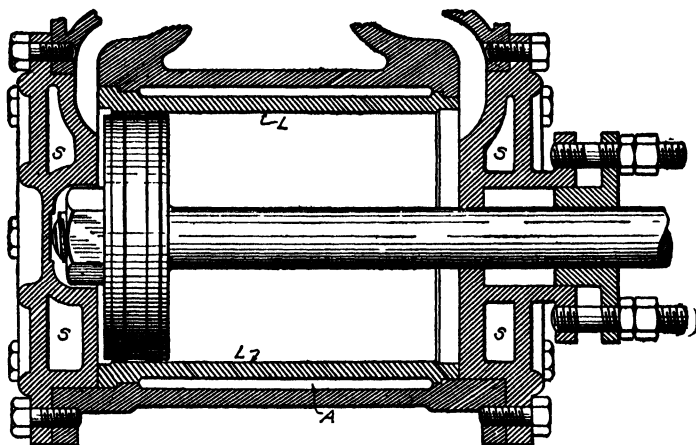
Section of Steam Engine Cylinder, Showing Method of Jacketing
